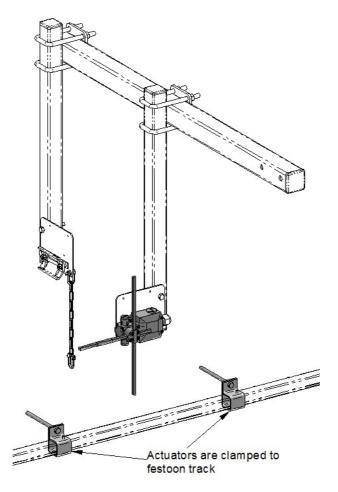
Traverse Limit Double Girder arrangement (See Figure 21 for setting dimensions)
